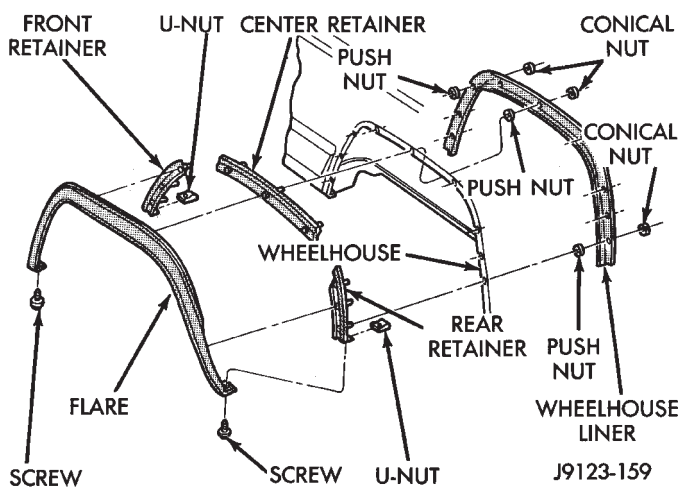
Rear Wheelhouse Flare, Retainers and Liner
